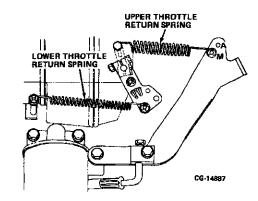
Remove Upper and Lower Throttle Return Springs
